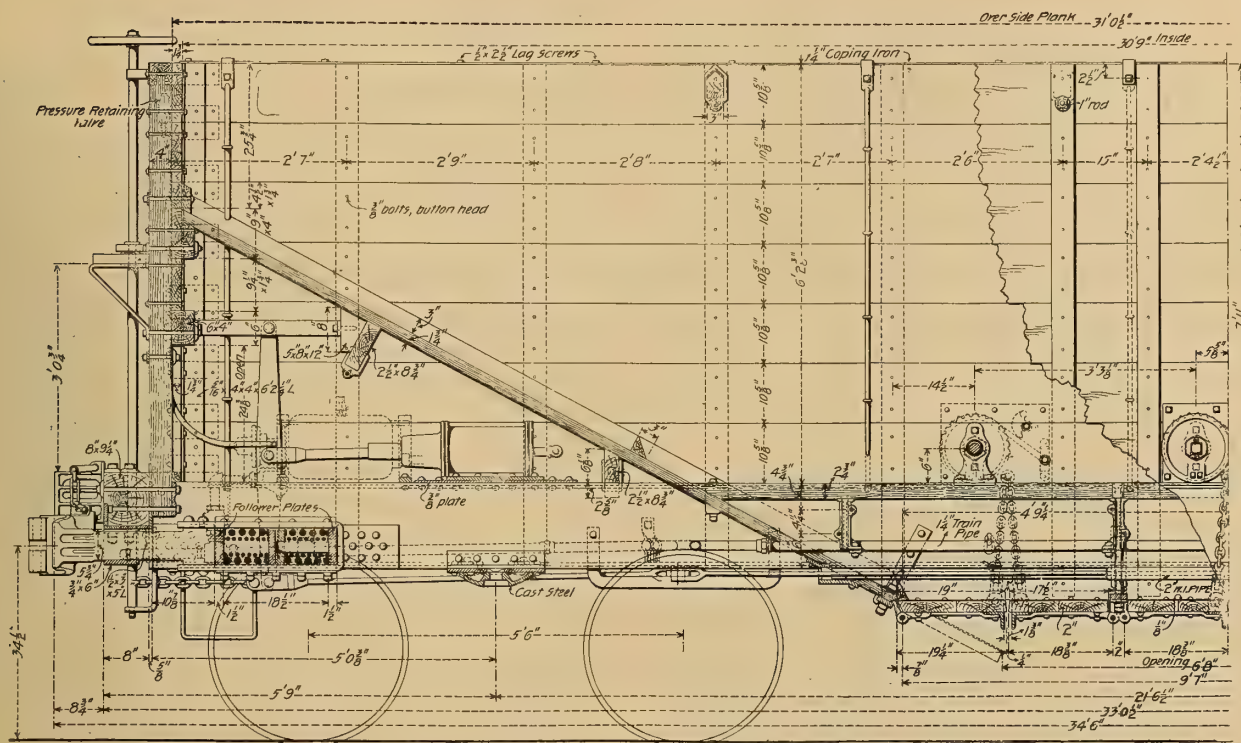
HALF SECTION OF 31-FT. HOPPER CAR WITH STRUCTURAL STEEL UNDERFRAME, N. & W. CAPACITY, 100,000 LBS.
